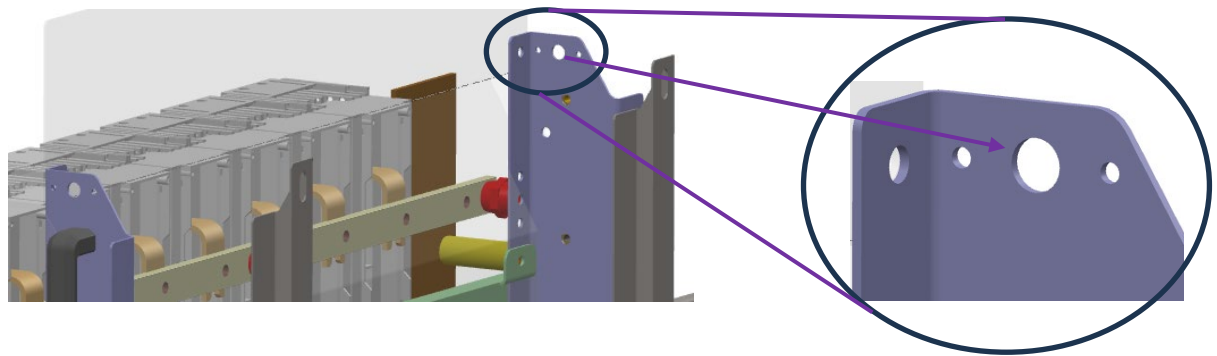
Universal Tank Mount Assembly for ABB - For Reference Only
